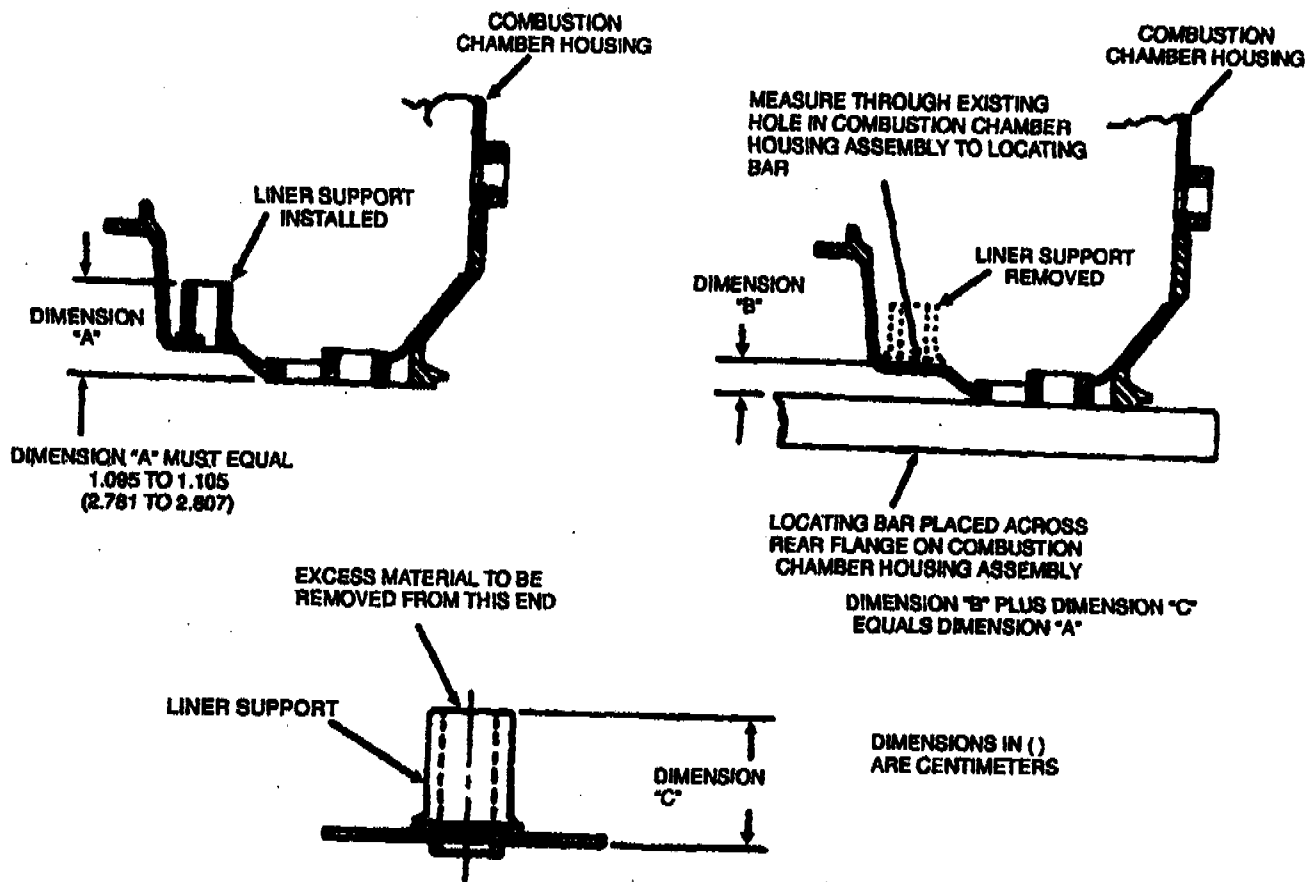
Determining Dimension for Proper Position of Combustion Chamber Liner.
